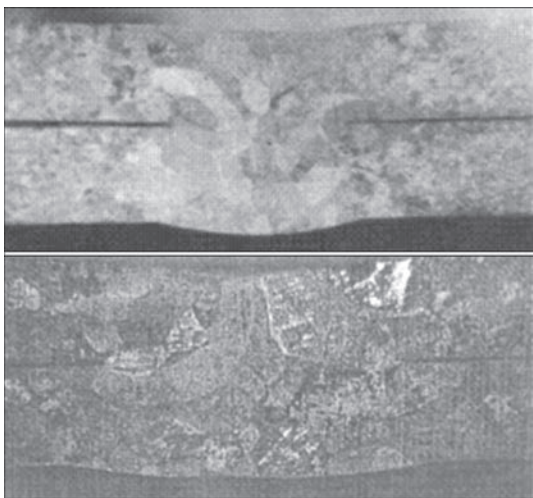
Macrostructures of cross-sections of spot overlapped welded joints from VT-20 alloy of $\delta = 2 + 2$ mm thick, produced by A-TIG welding without a gap
